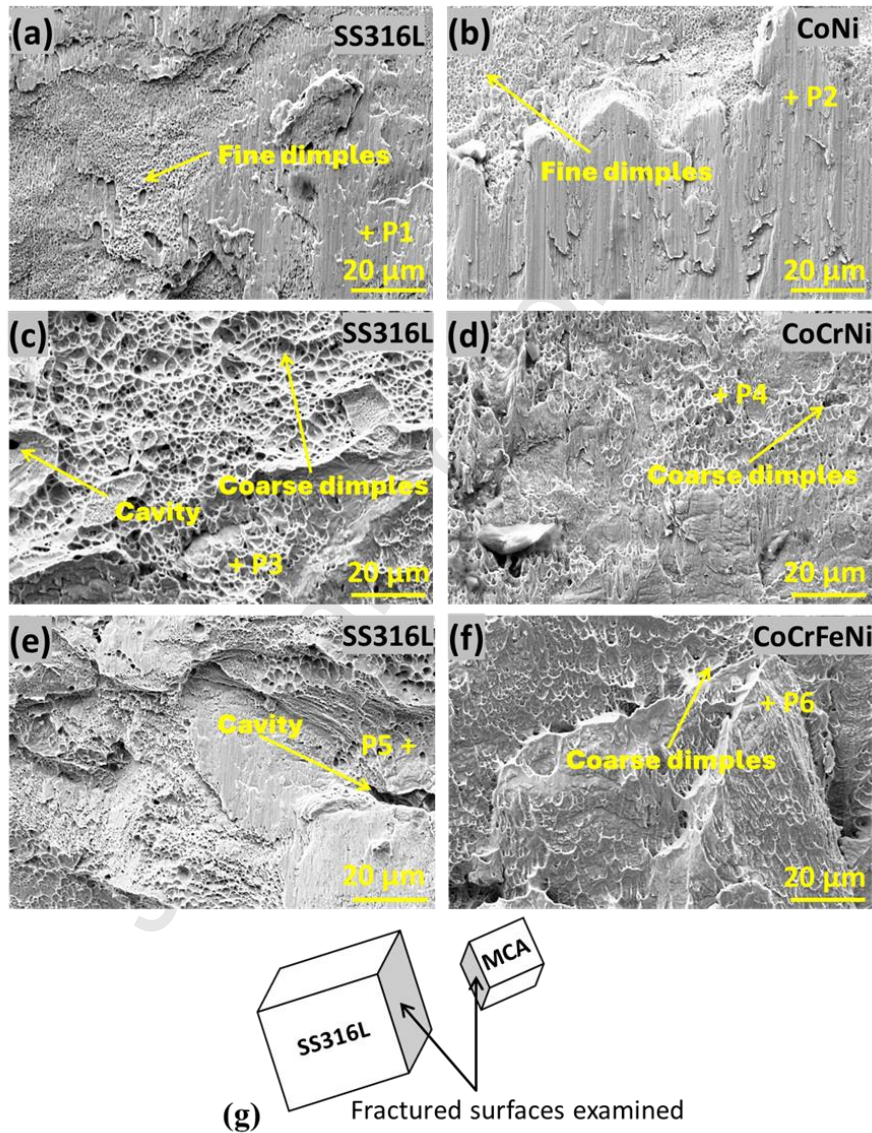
Microstructures of the fractured samples showing various features, (a – b) SS316L-CoNi diffusion welded sample, (c - d) SS316L-CoCrNi DFW sample, (e - f) SS316L-CoCrFeNi DFW sample (g) SS316L and MCA fractured surfaces examined.
